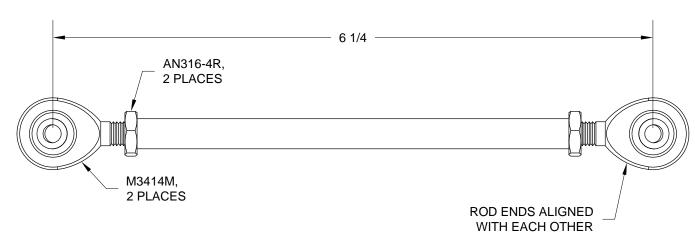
PITCH SERVO PUSHROD ASSEMBLY
